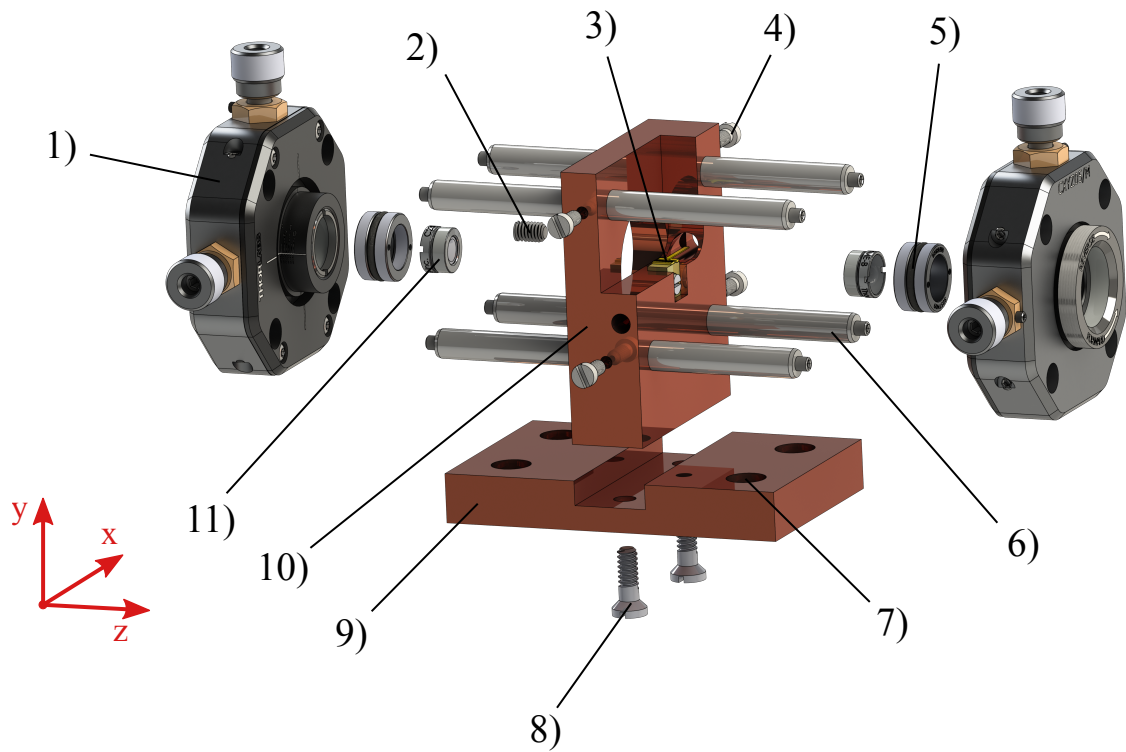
Components of the cage system. 1) Translation mount, 2) headless M4 plastic set screw for cathode pin guiding, 3) TA chip, 4) M3 plastic set screws for cage rods, 5) adapter for threads of lens and translation mount, 6) cage rods, 7) counterbored holes for plastic screws, 8) M4 countersunk screws, 9) copper baseplate, 10) mounting copper block, 11) aspheric lens.
